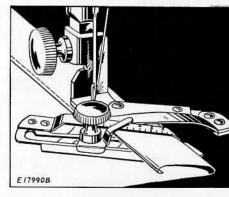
Making Hem Up to 15/16 Inch Wide With Adjustable Hemmer
